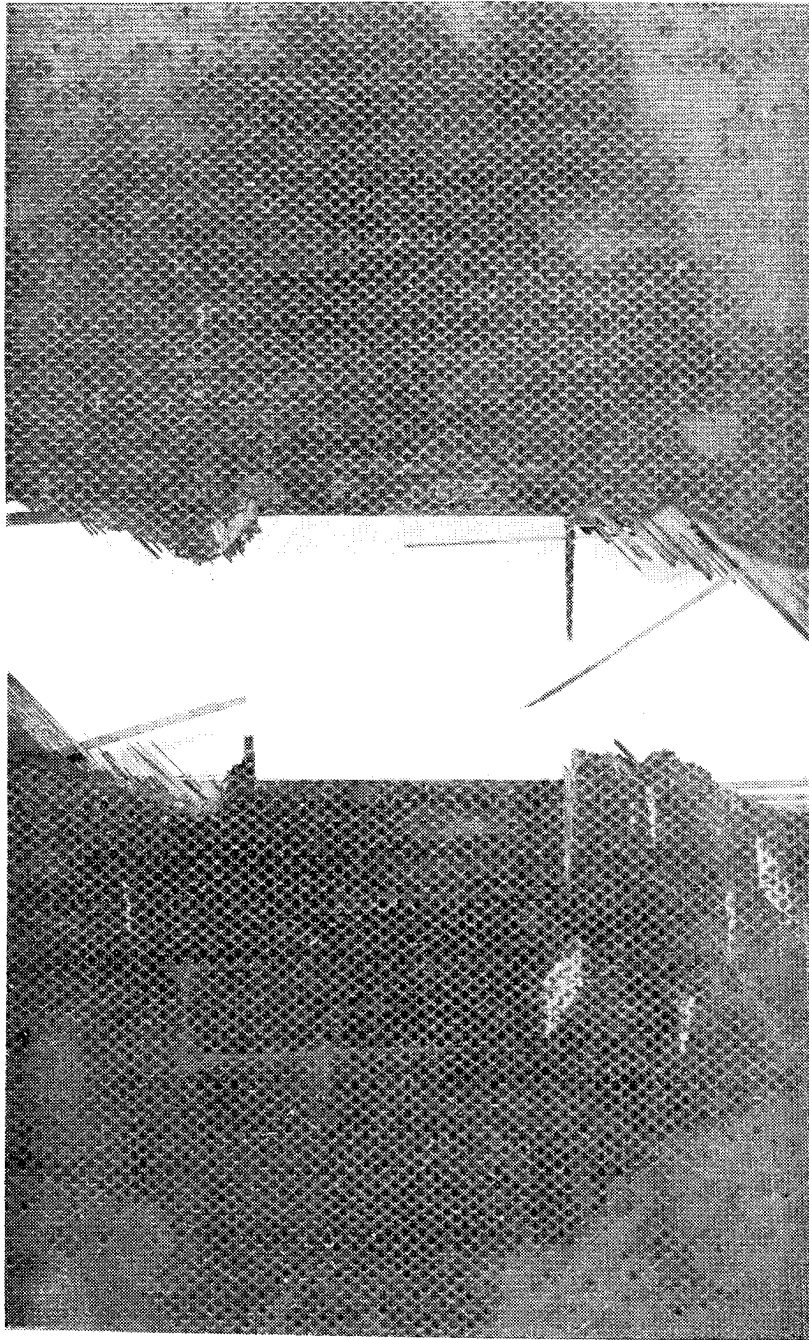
Photograph of the Fracture Surface of a $[0/\pm 45/90]_S$ Specimen
